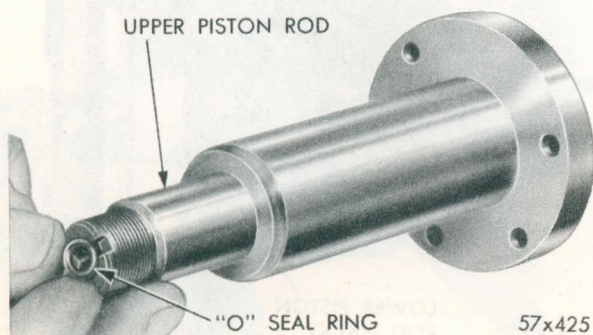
Installing Upper Valve Rod "O" Seal Ring
